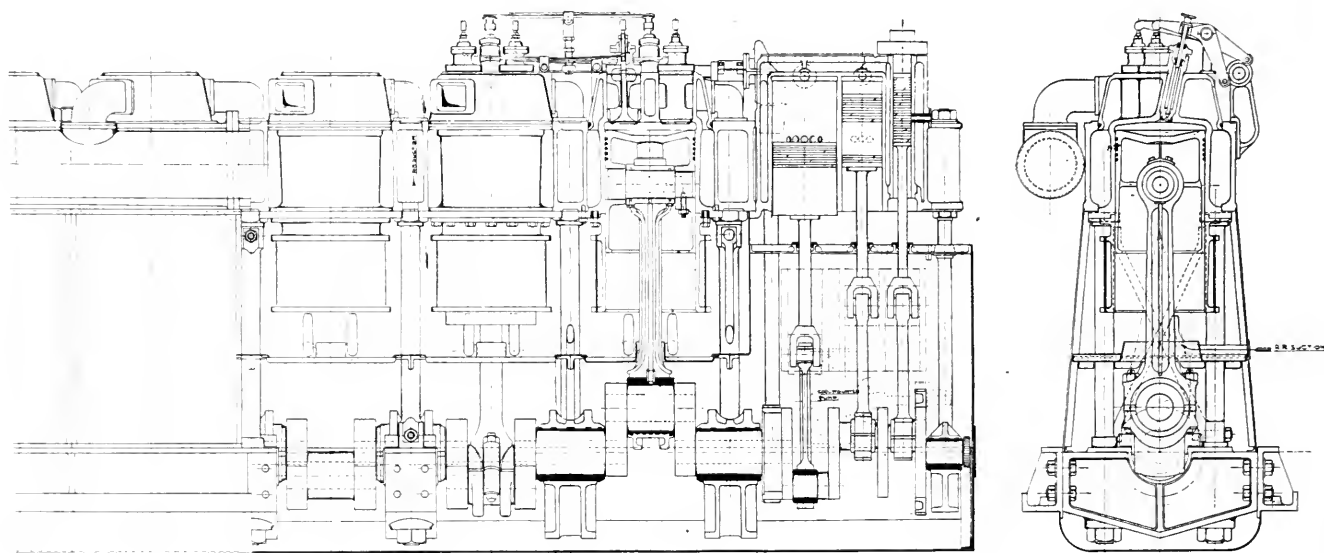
SUBMARINE DIESEL-TYPE ENGINE. THERE IS ALSO A DESIGN OF SMALLER POWER IN WHICH THE WEIGHT HAS BEEN REDUCED TO 31.5 LB. PER B.H.P.
